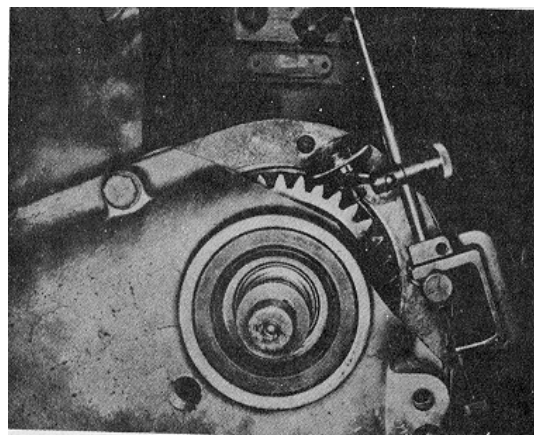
, (N114132). Checking accessory drive gear backlash
